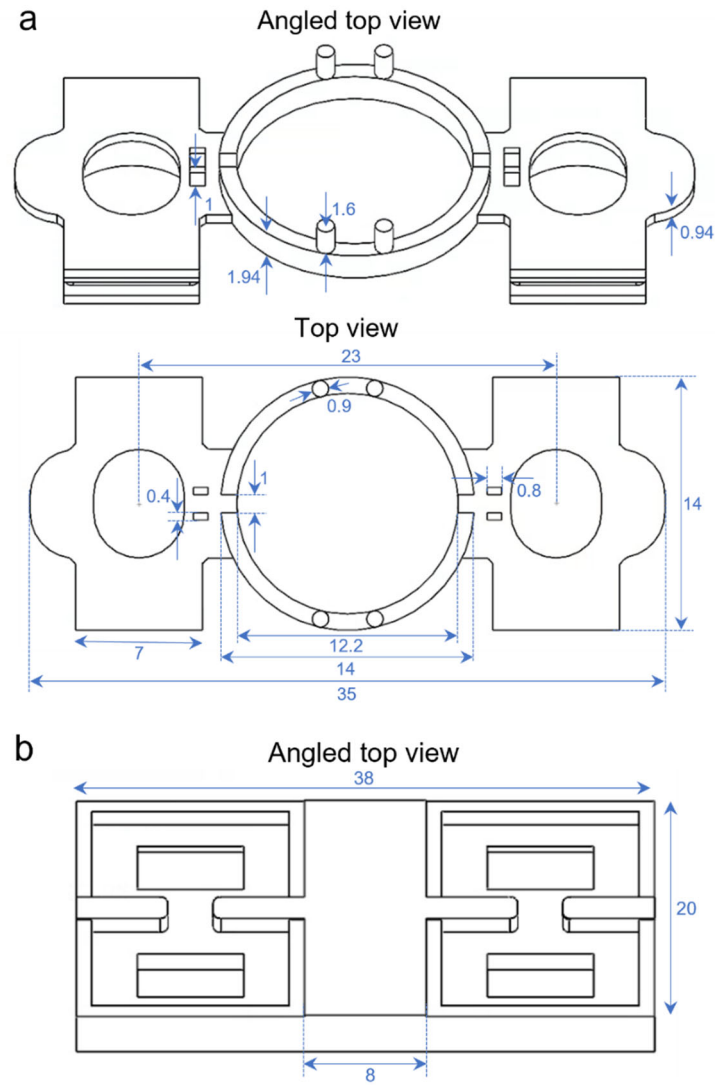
Designs of 3D printed parts for bipedal eBibot. CAD with dimensions of (a) bipedal eBibot skeleton and (b) its tissue seeding mold. Units: mm.
